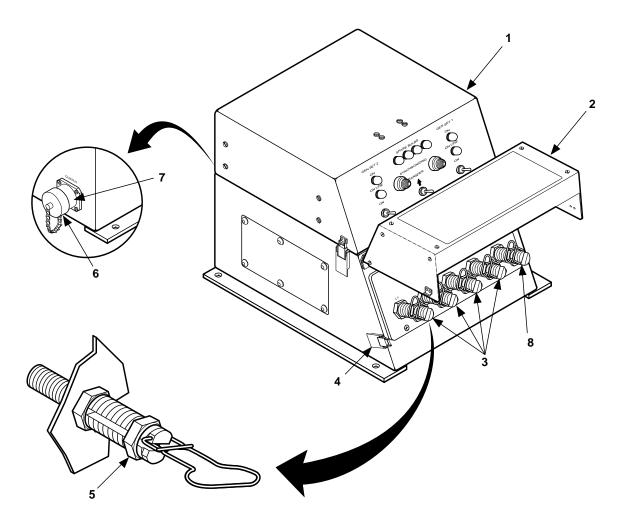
Switch Box Load Cable Connections (OLD).
